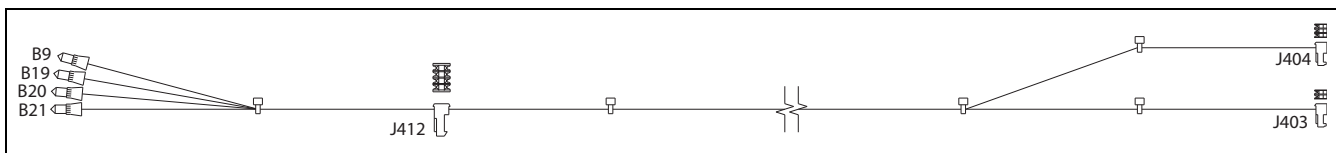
Connecting CRIND Two-wire Cable from Pump Control Board to HIP Assembly
